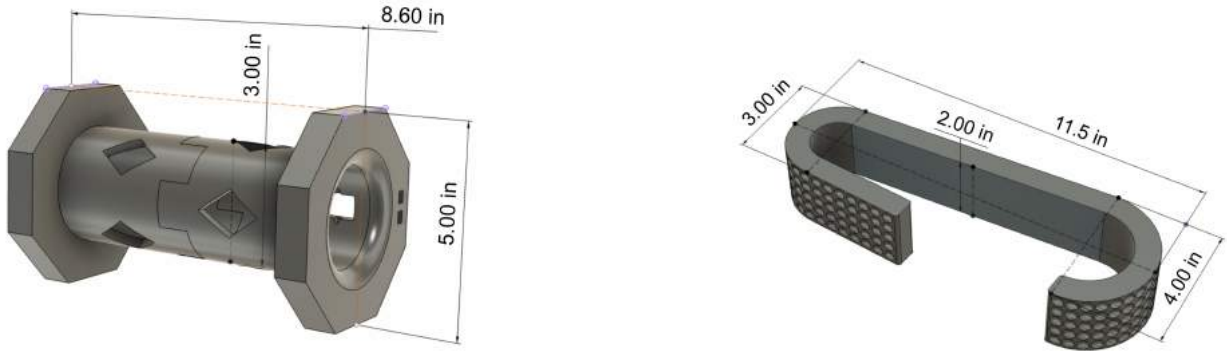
Technical drawing of objects (Left: hose connector, Right: hook) used for real-world experiments, with dimensions in inches.
